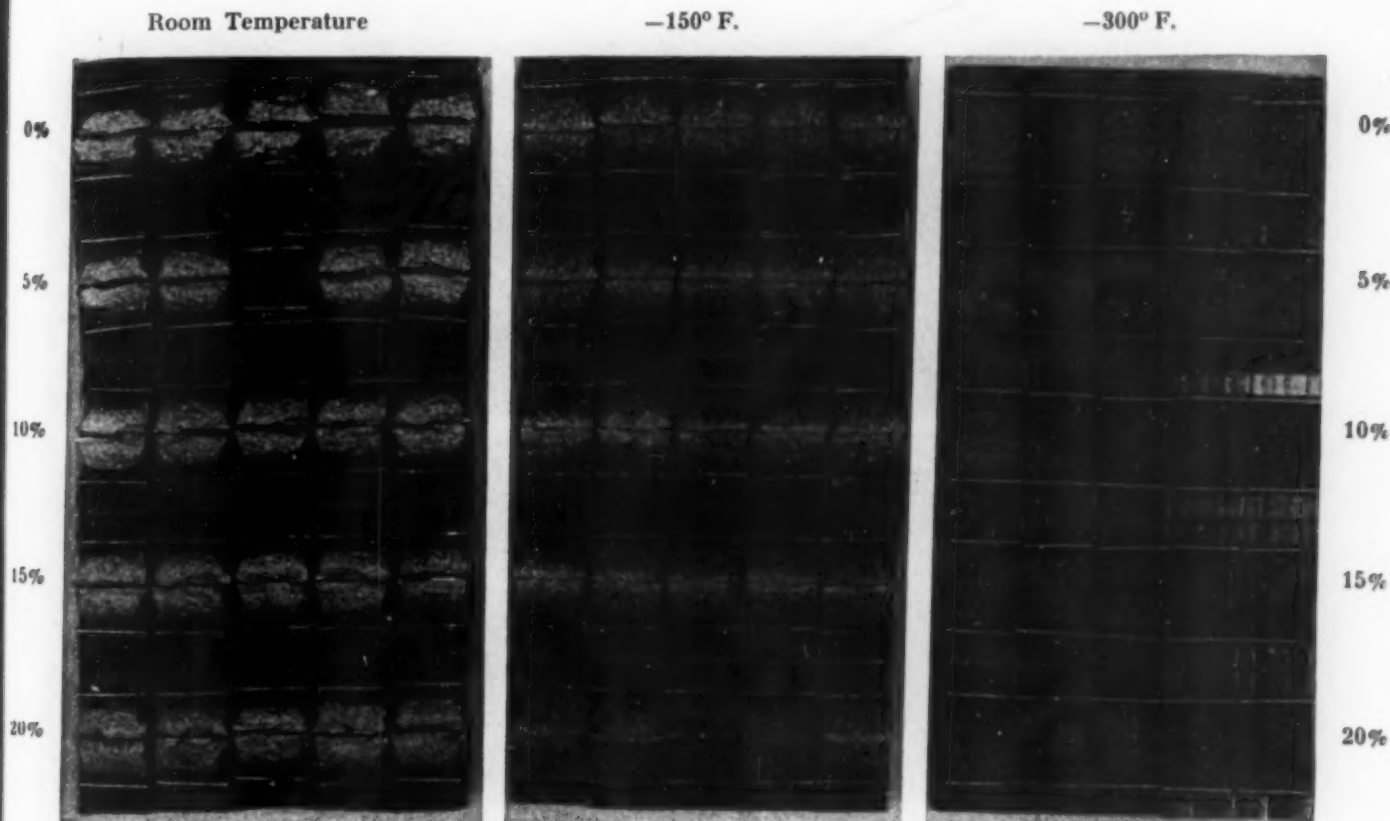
Impact Test Bar Fractures for Type 302 in the Sensitized Condition. (Full size)
